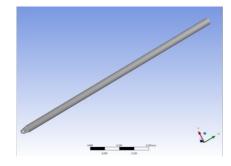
Geometry of Ball Screw for Fatigue Analysis.
